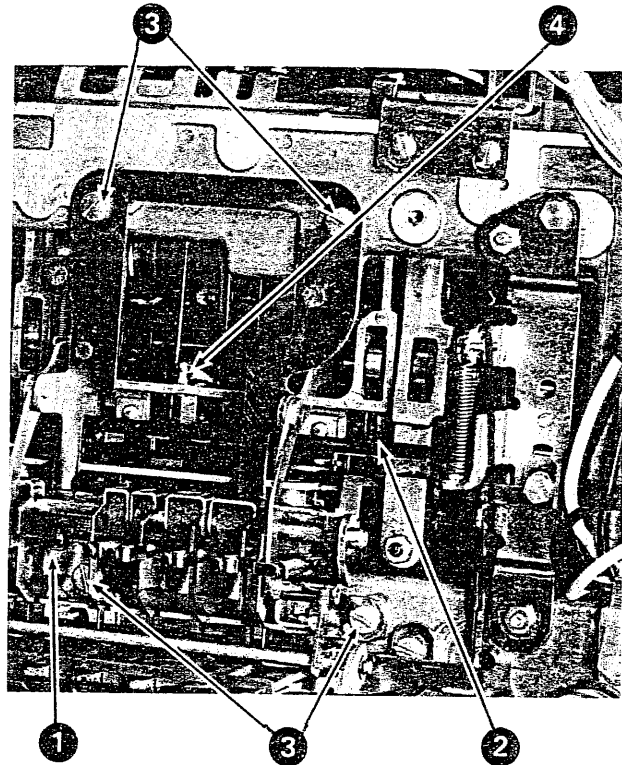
Differential-Plate Removal (Steps 6-10)
